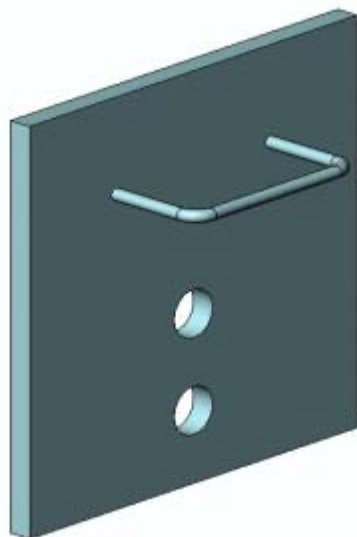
Vacuum plate with the holes for two sealed OSEE sensor's feed through connectors.
